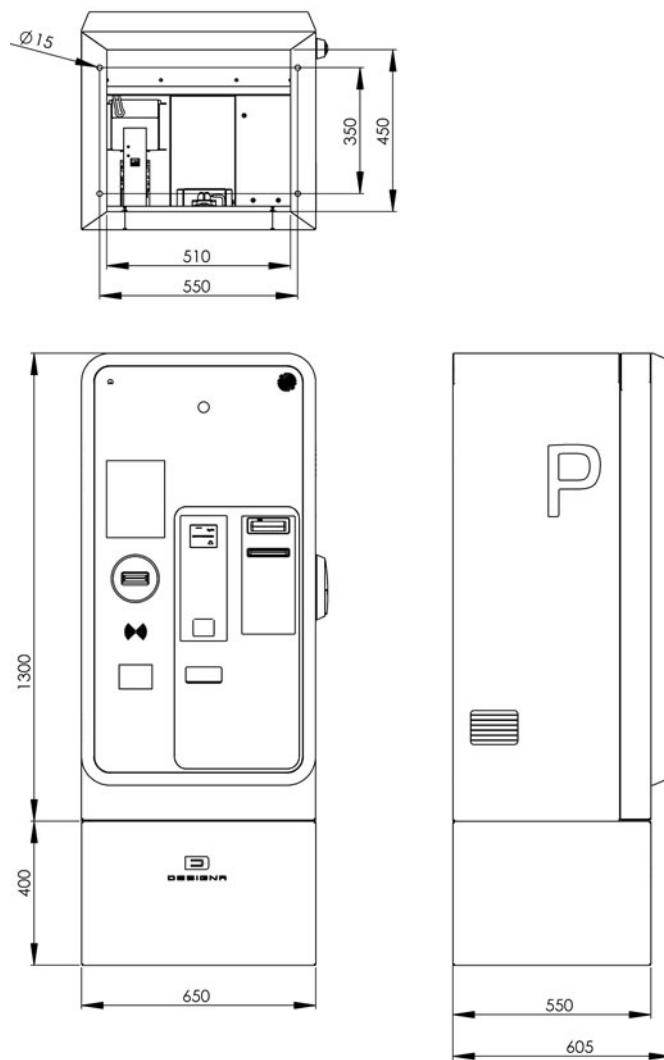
Pay Coinless, with optional illuminated frame, dimensions in mm
